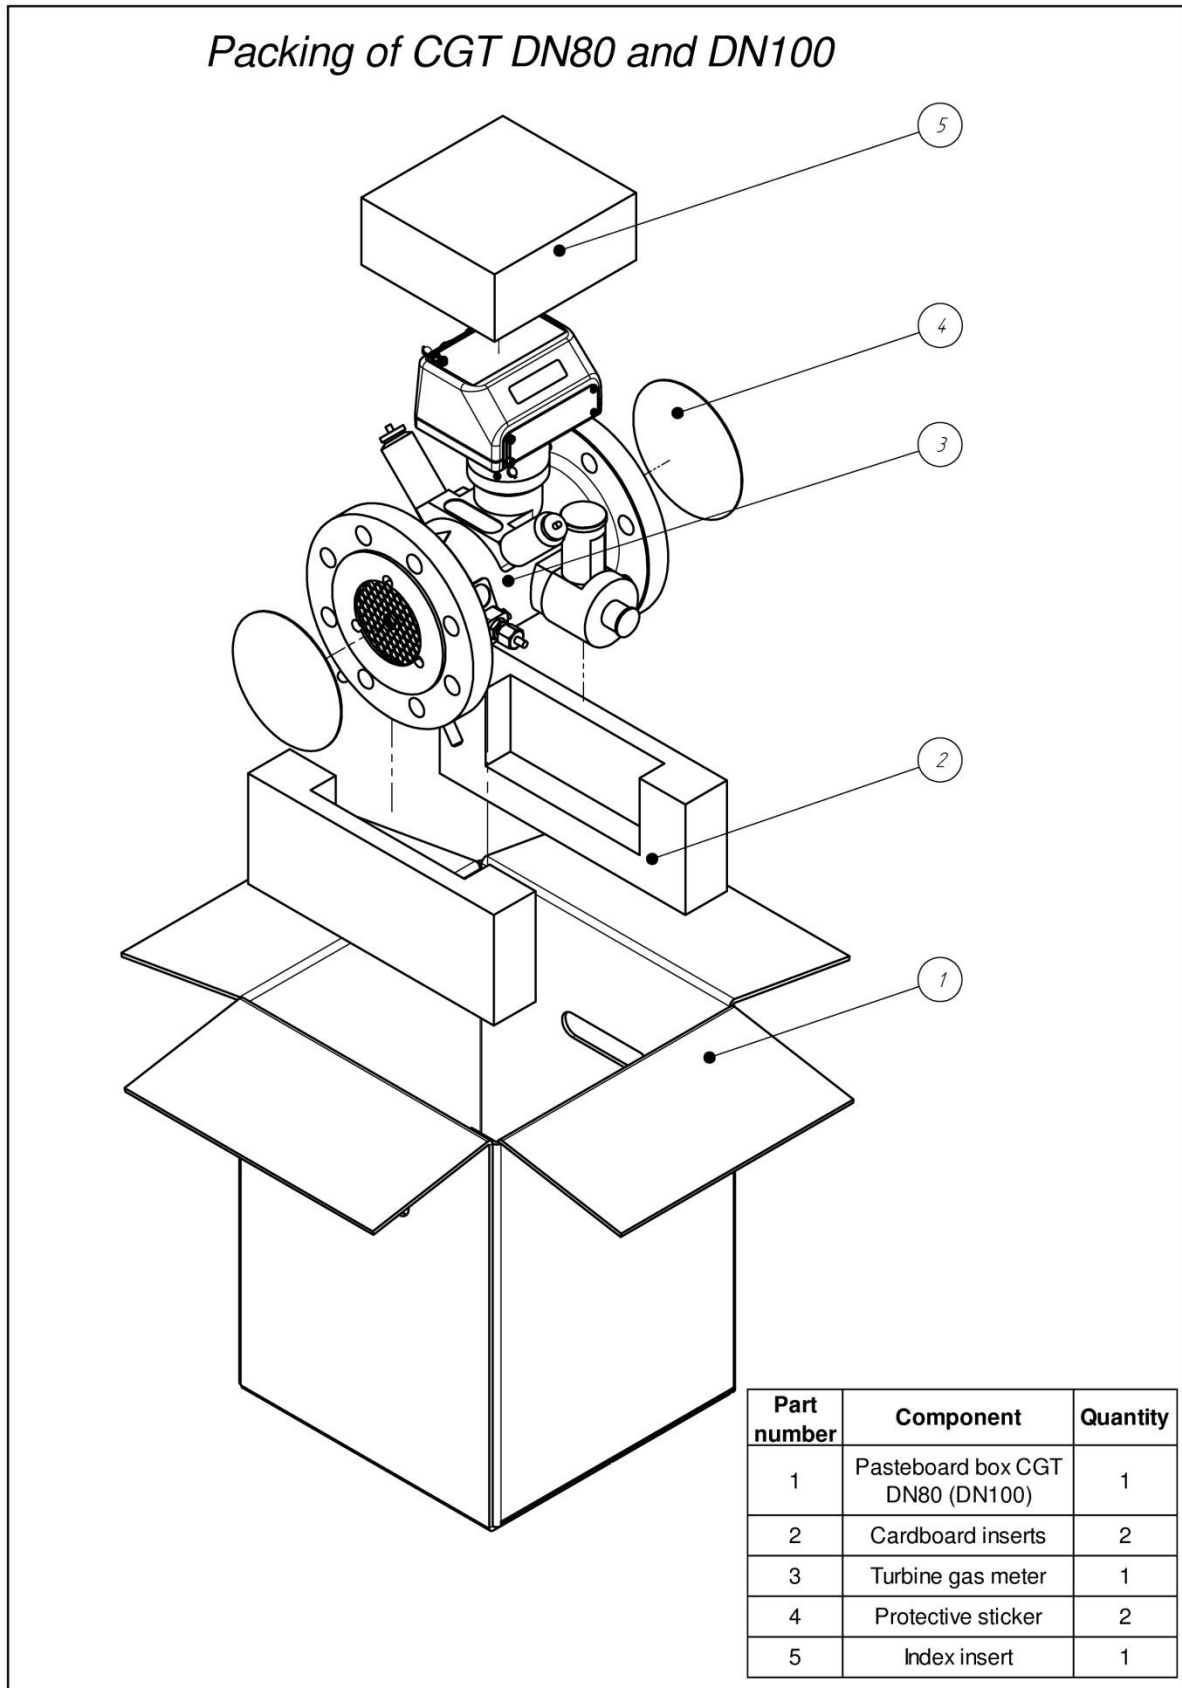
Packaging of DN80 and DN100 turbine gas meters
